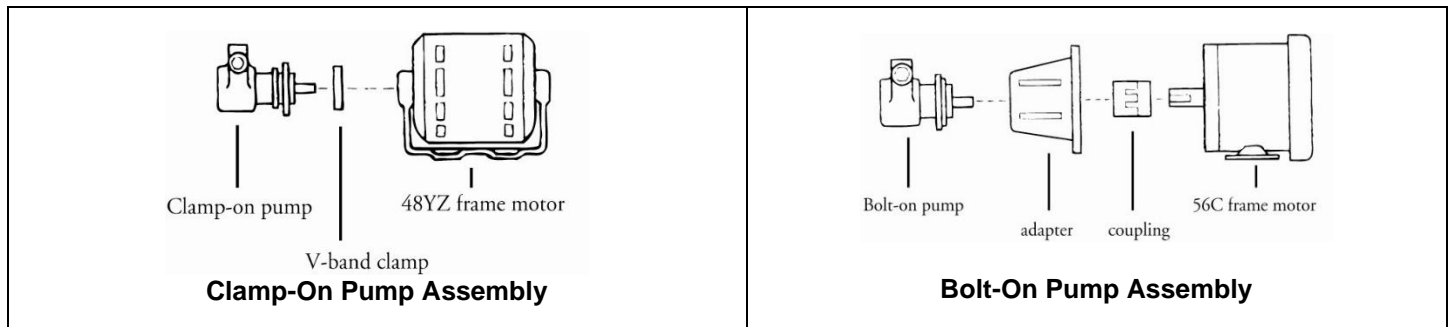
Clamp-On and Bolt-On Pump Assembly
